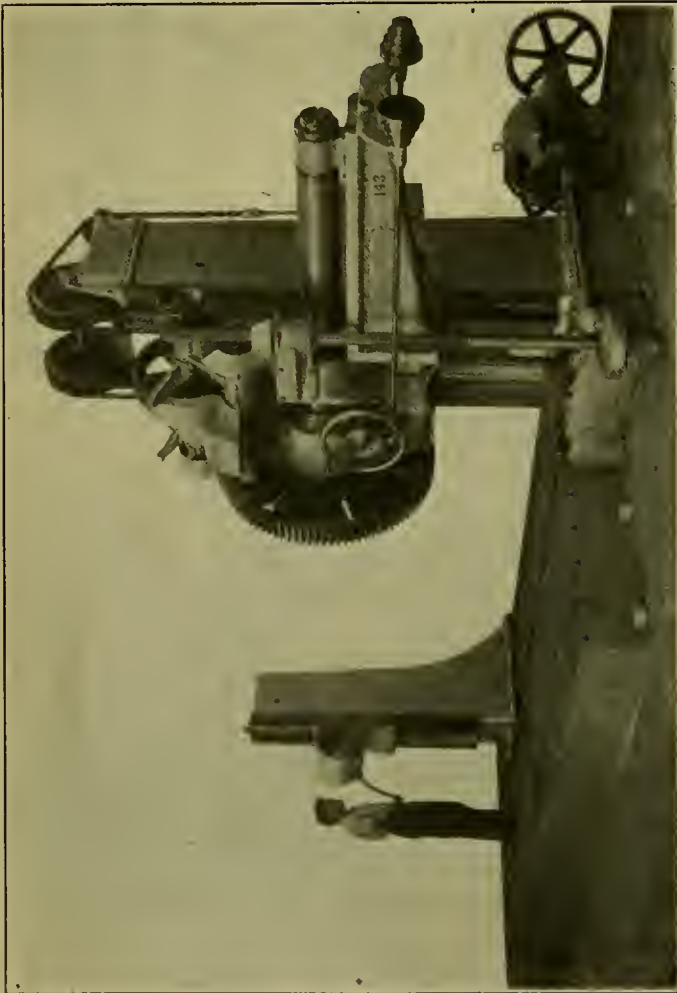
DIRECT DRIVE FOR A LARGE HORIZONTAL BORING, MILLING AND DRILLING MACHINE.—BEAMAN & SMITH.
